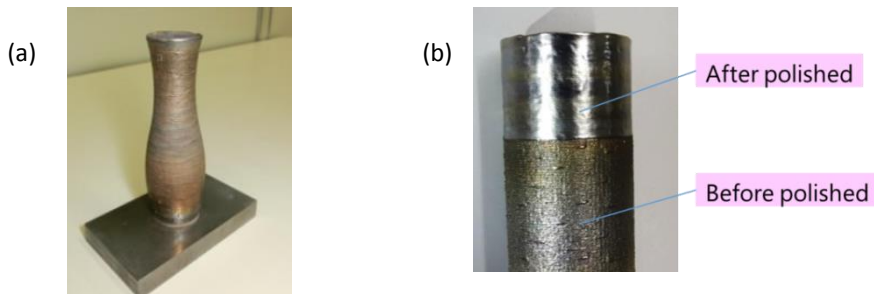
Parts built with the prototype. (a) A “cup” figure of SUS316L at a height of 60 mm; (b) Laser polished workpiece. Roughness of upper polished surface is $3.9\ \mu\text{m}$ and lower “as built” surface is $14.1\ \mu\text{m}$.
